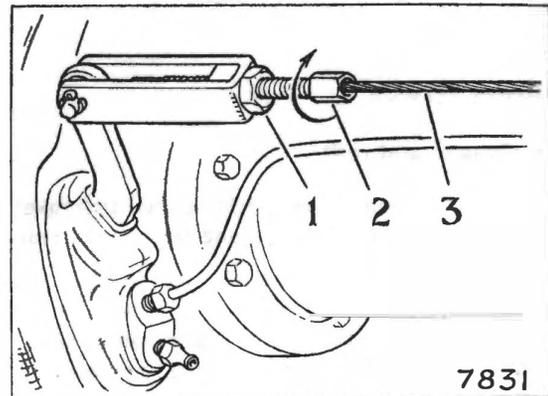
The handbrake cable adjuster, the arrow indicates the direction of rotation to shorten the cable.
